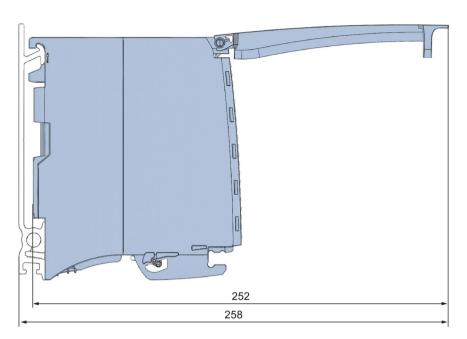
Dimension drawing of the DQ 16x24...48VUC/125VDC/0.5A ST module, side view with open front cover
